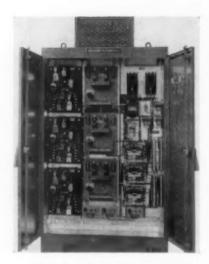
This is the control c cabinet for a special Gisholt machine for performing the clutch facing operation on automobile flywheels.
